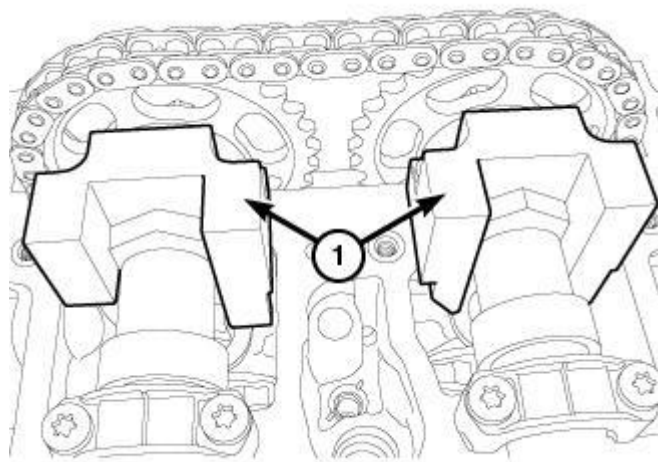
Ensuring Camshaft Mark Is Aligned With Bearing Cap Mark
